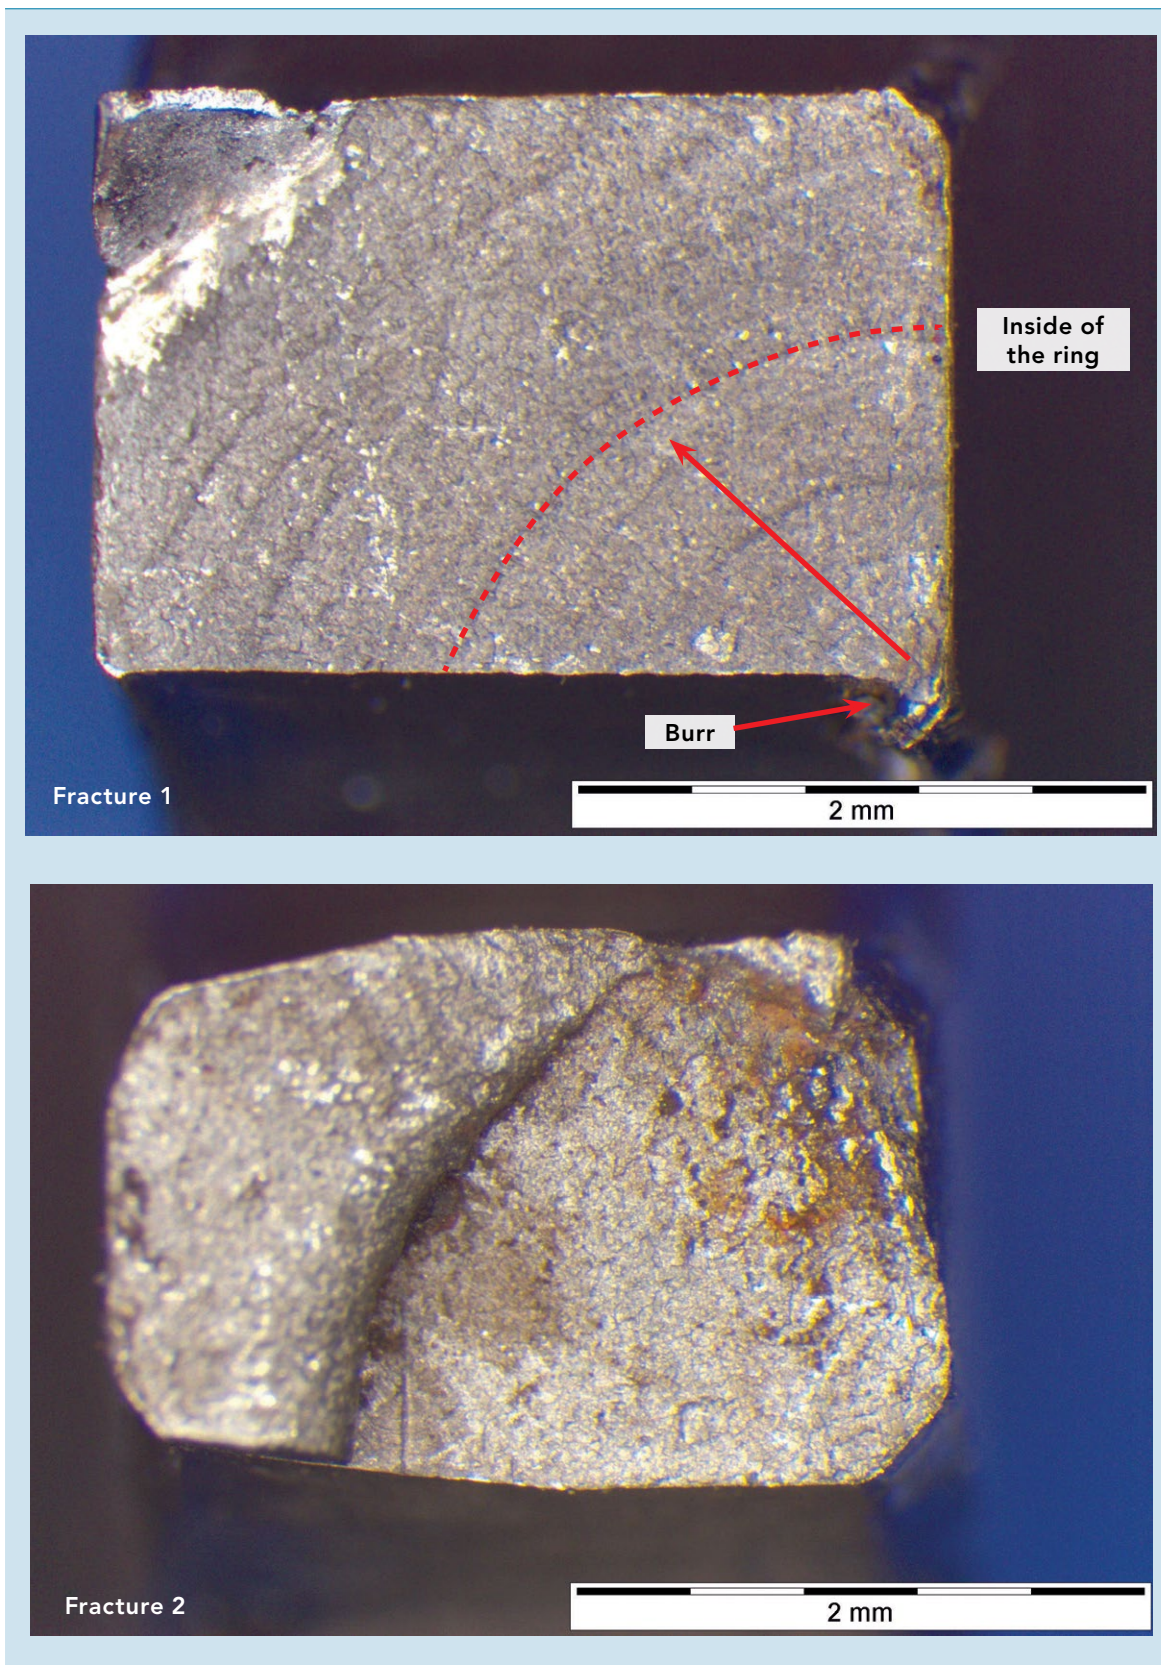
The photographs show the two fractures in the ring from switch 3B. The fracture surfaces demonstrate evidence of fatigue fractures. (Source: ProRail)
